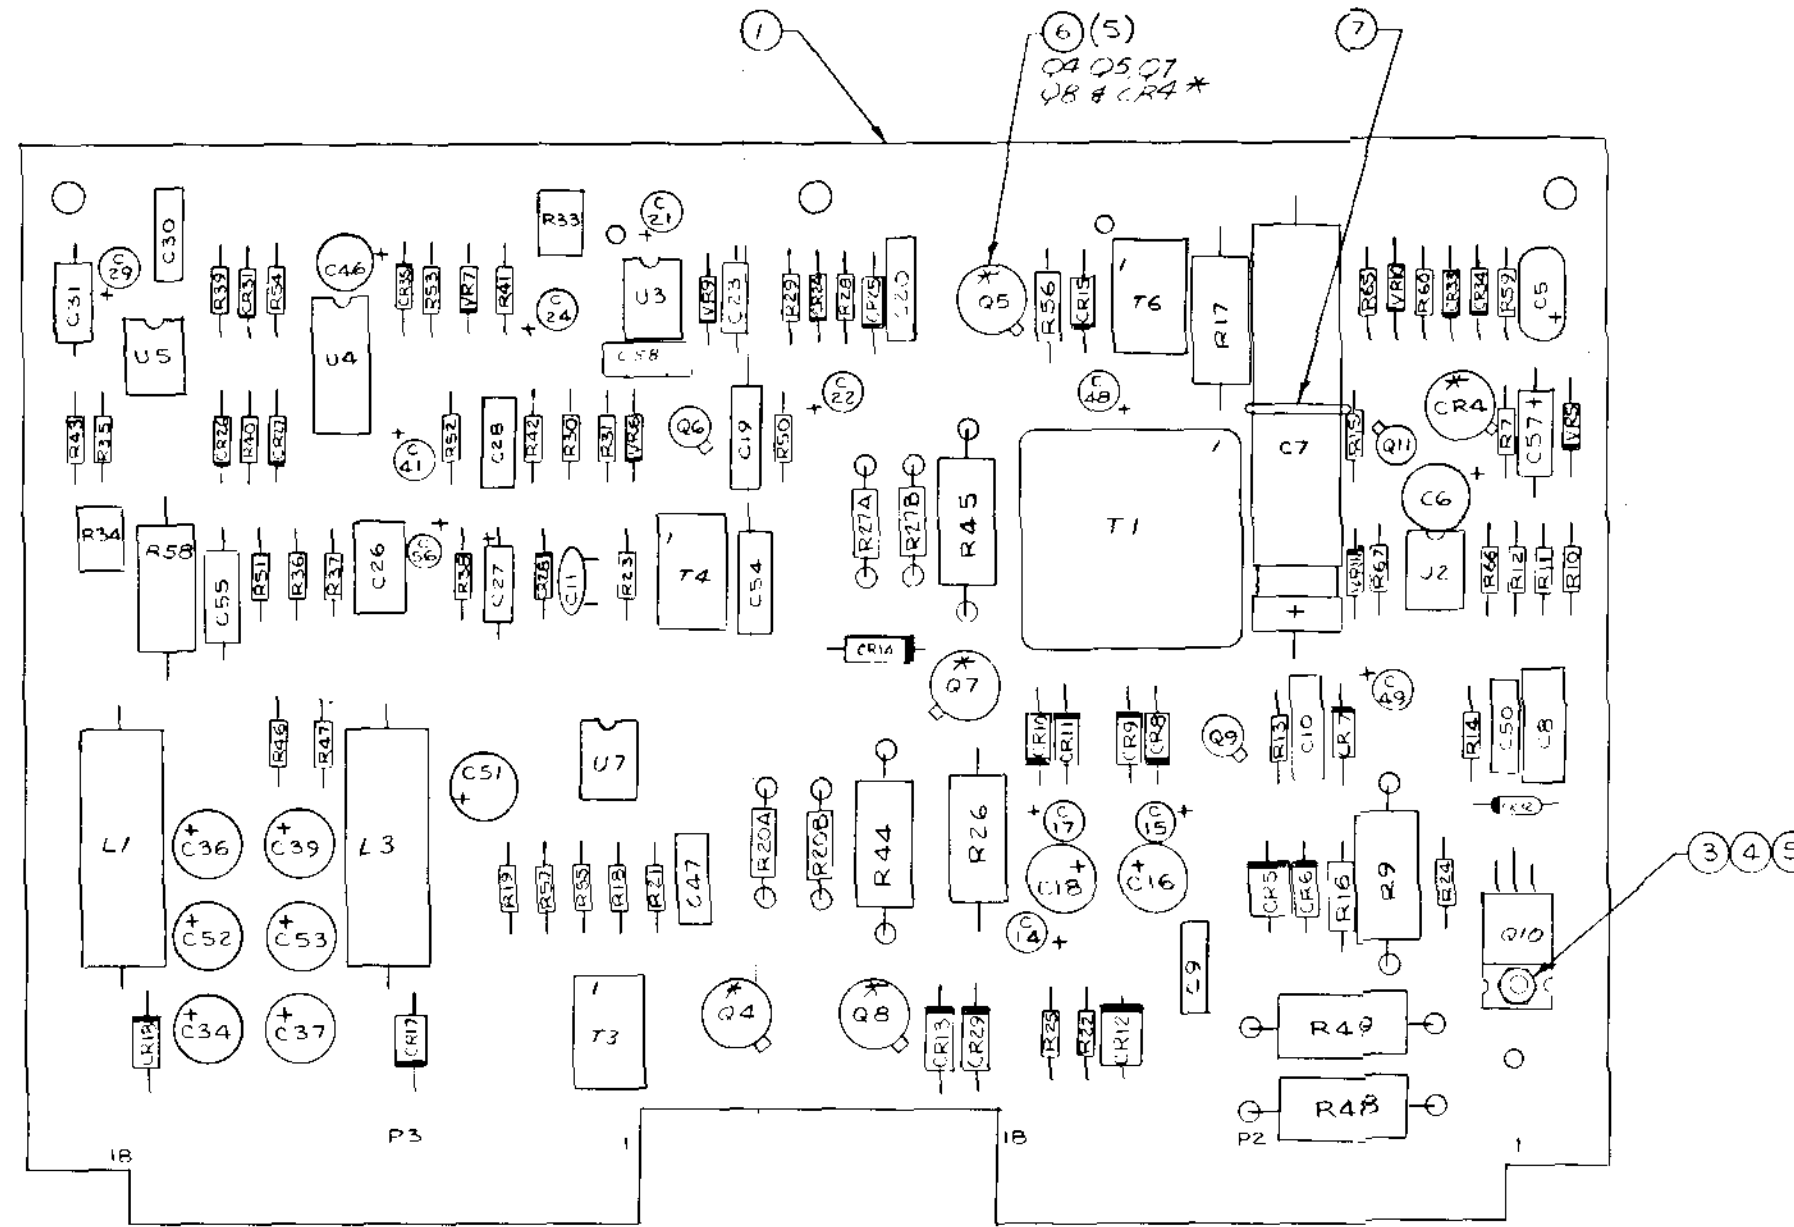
TM Low Voltage Power Supply (A20A8) Assembly Drawing
